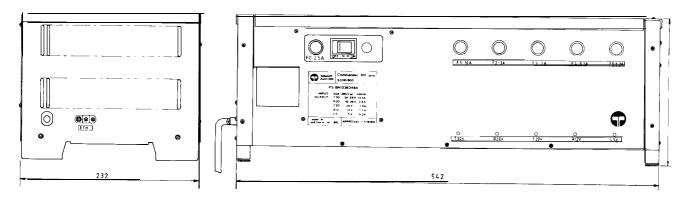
(a) BN-1236/2464 POWER SUPPLY DIMENSIONS
